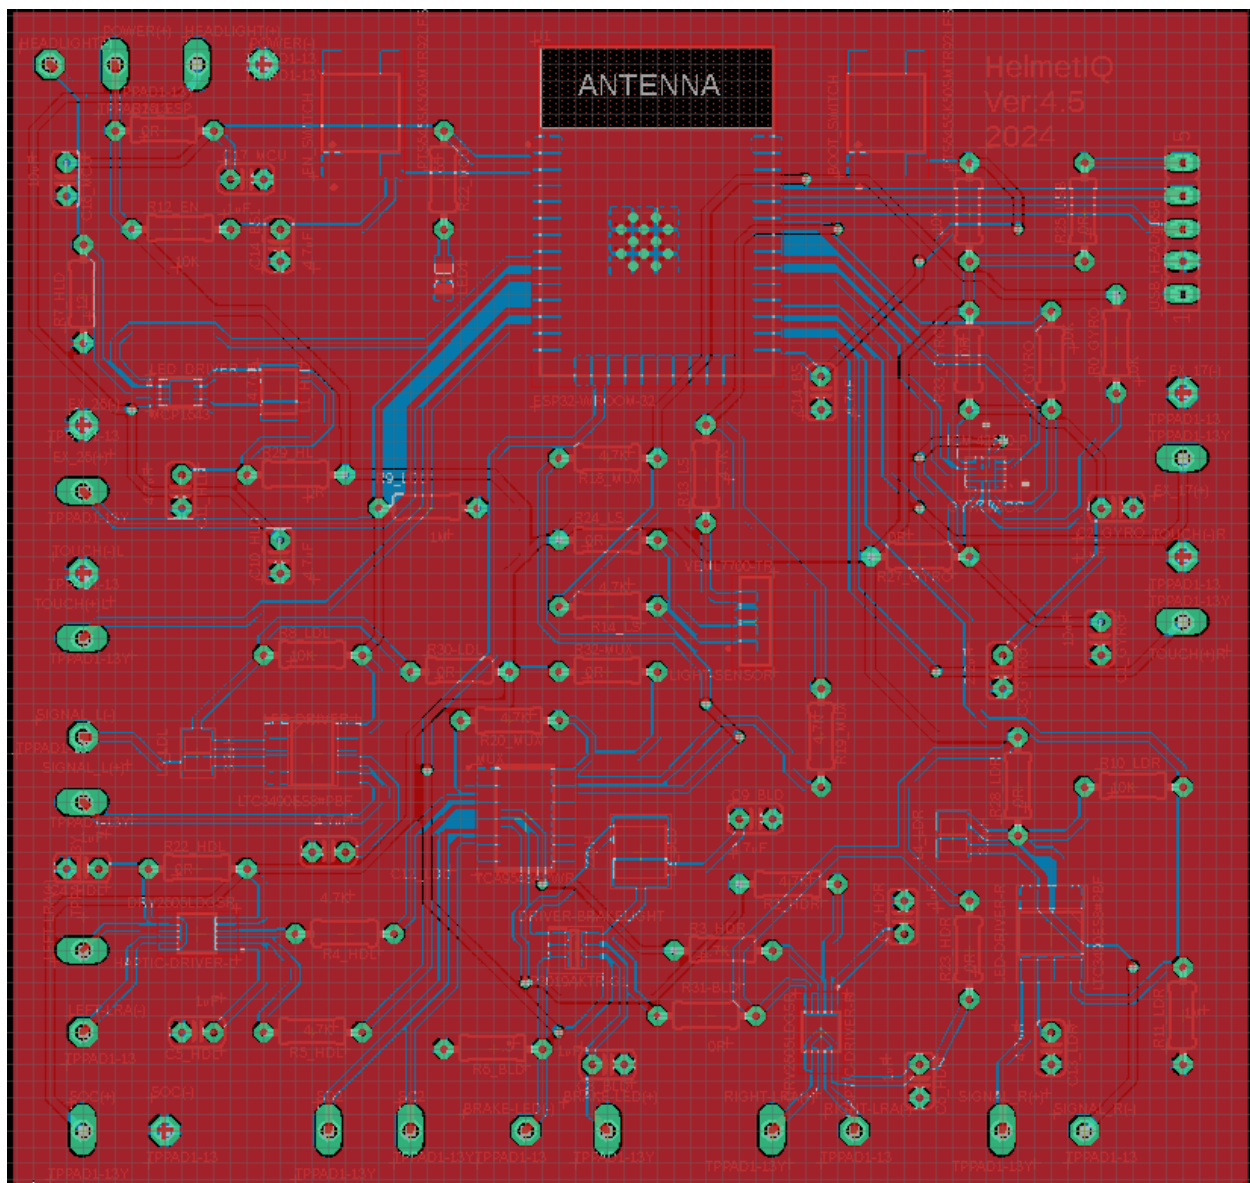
Final HelmetIQ PCB Ver.4.5
